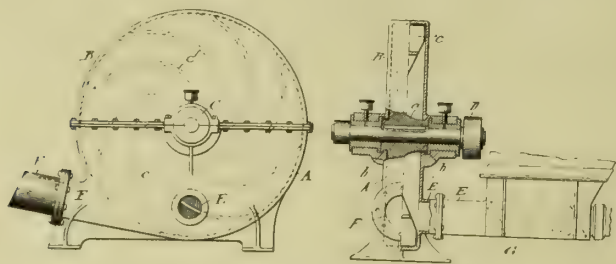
CHARGING MACHINE FOR ZINC RETORTS.
